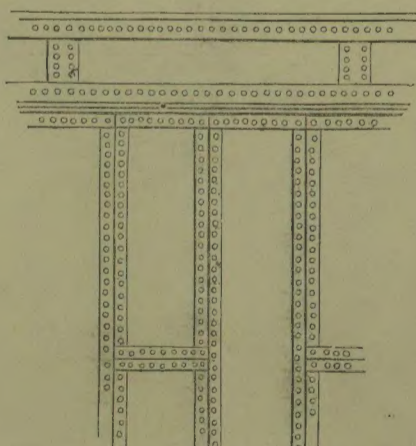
EXTERIOR APPEARANCE OF IRON PLATES RIVETED TOGETHER.
